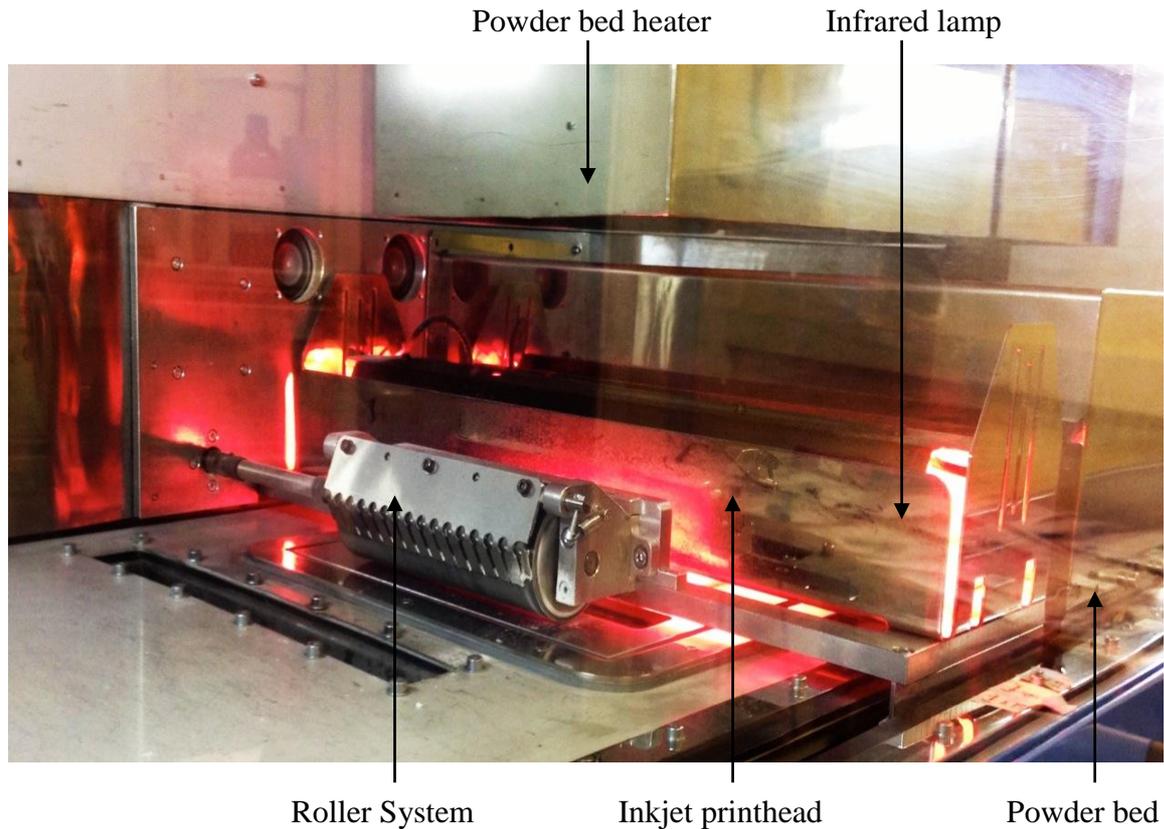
shows the High Speed Sintering machine and its key parts; powder bed heater, infrared lamp, roller system, inkjet printhead and powder bed.
